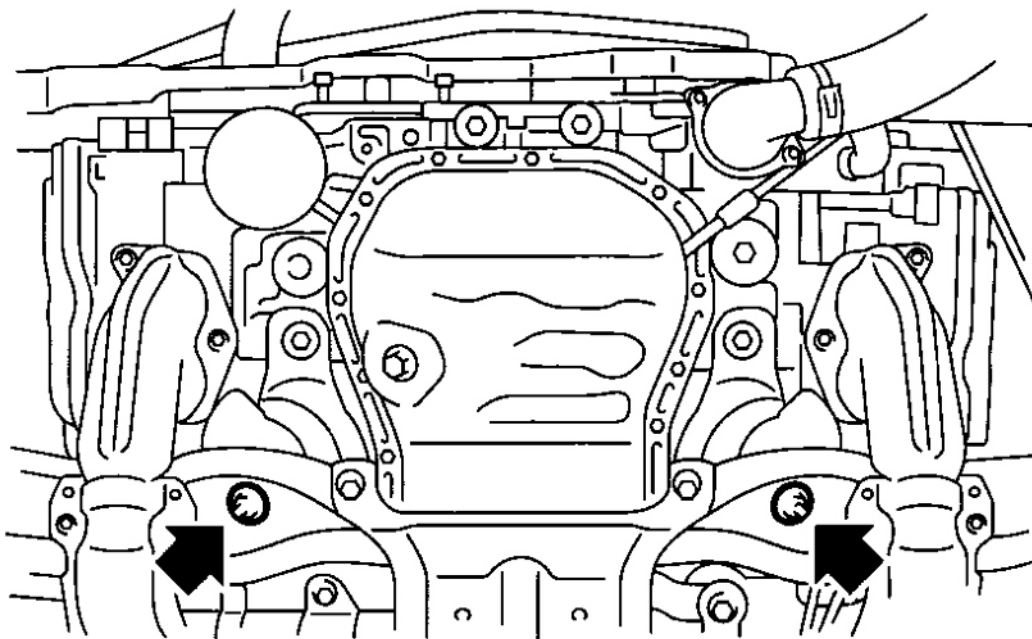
Removing Nuts Which Hold Lower Side Of Transmission To Engine
